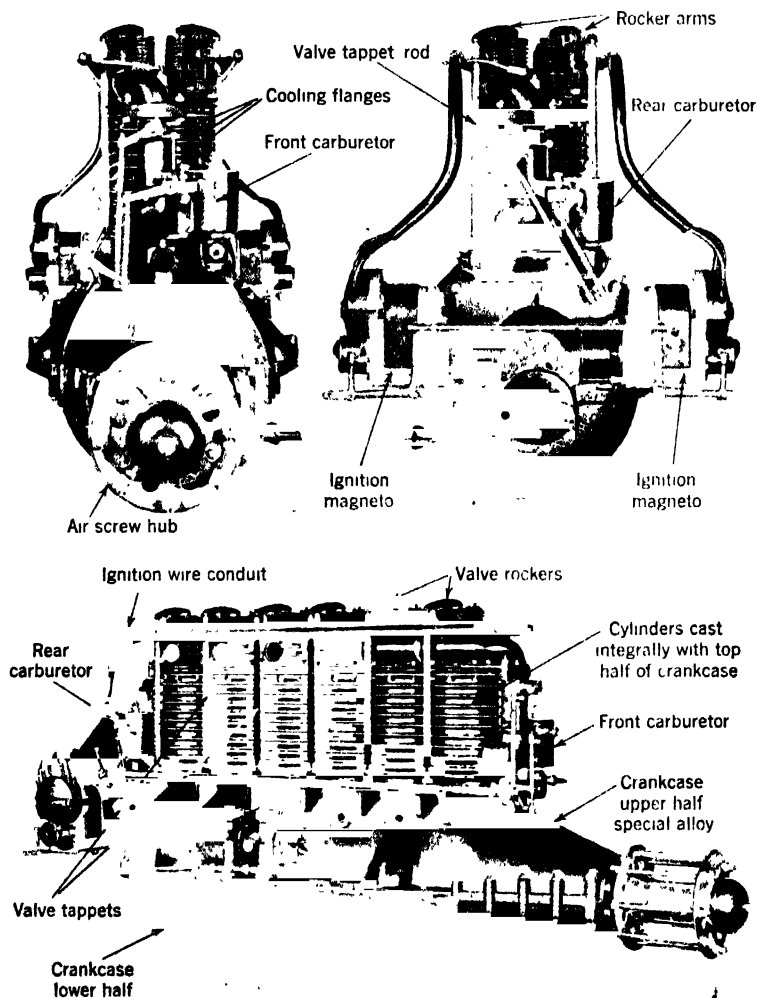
A.—Views of the Isotta Fraschini ASSO 80T Air-Cooled Engine Which Has Six Cylinders Cast Integrally with Top Half of Crankcase, Which is a Special Magnesium Alloy Known as Electron. Steel Liners Are Used in the Cylinders.
